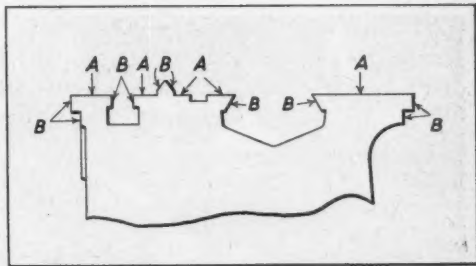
Diagrammatic cross-sectional view of the bed, for a Lees-Bradner 8- by 72-in. spline hobbing machine
